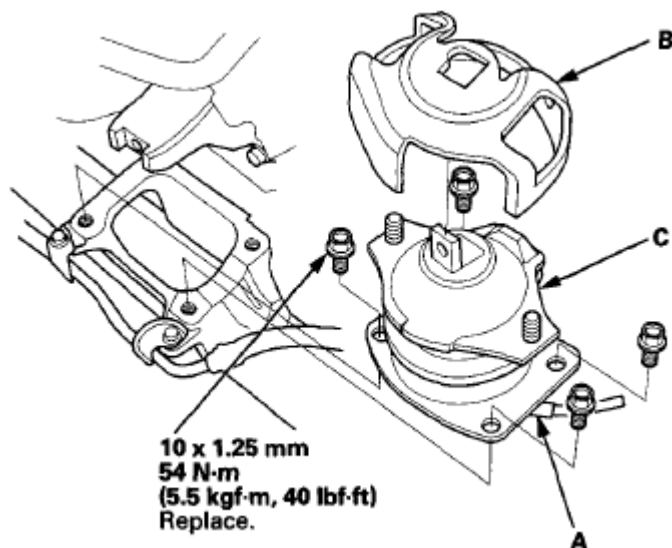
Installing Engine Mount Insulator To Front Engine Mount With Torque Specifications
